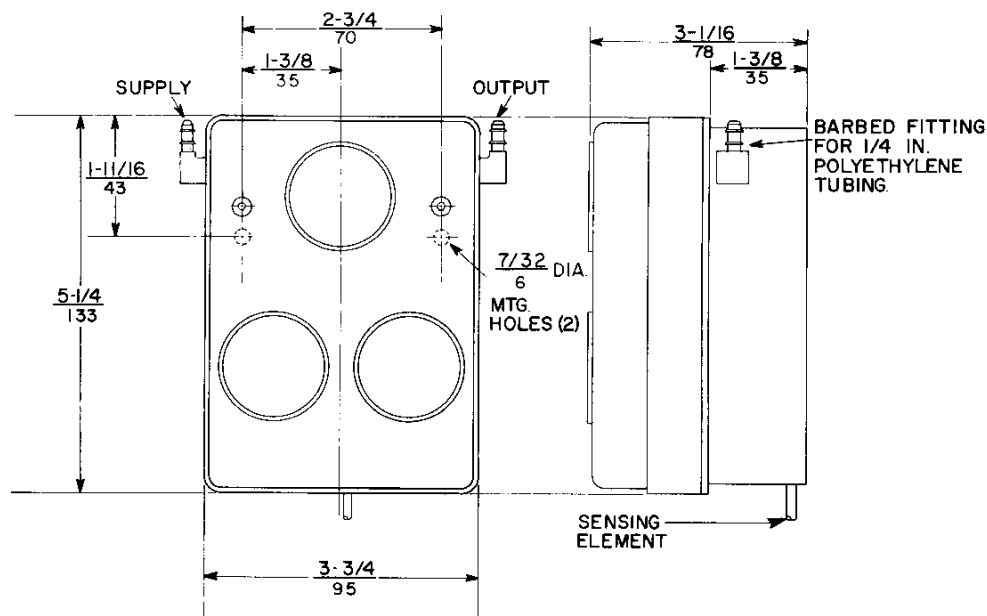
Dimensions $\frac{\text{in.}}{\text{mm}}$
